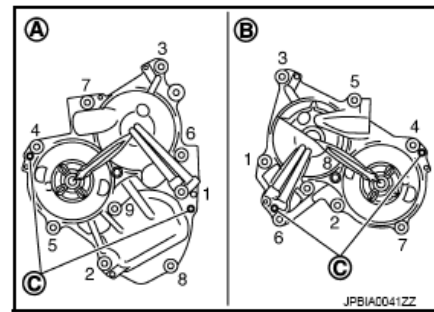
Identifying Timing Chain Mounting Bolts Tightening Sequence
